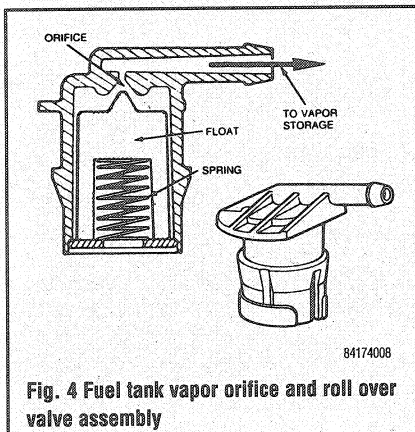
Fuel tank vapor orifice and roll over valve assembly
